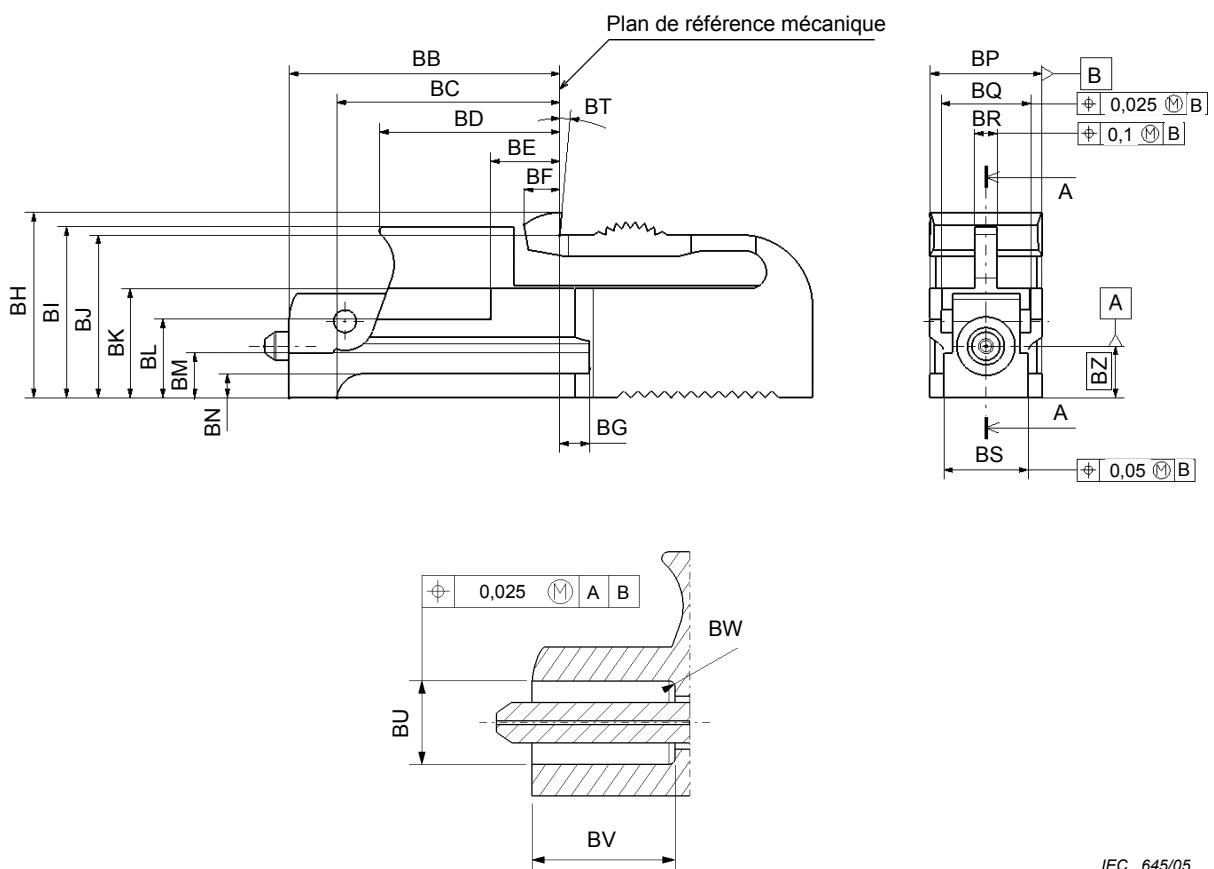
Detail A of Figure 1 – APC polish plug connector interface – Expanded view drawings not-to-scale
